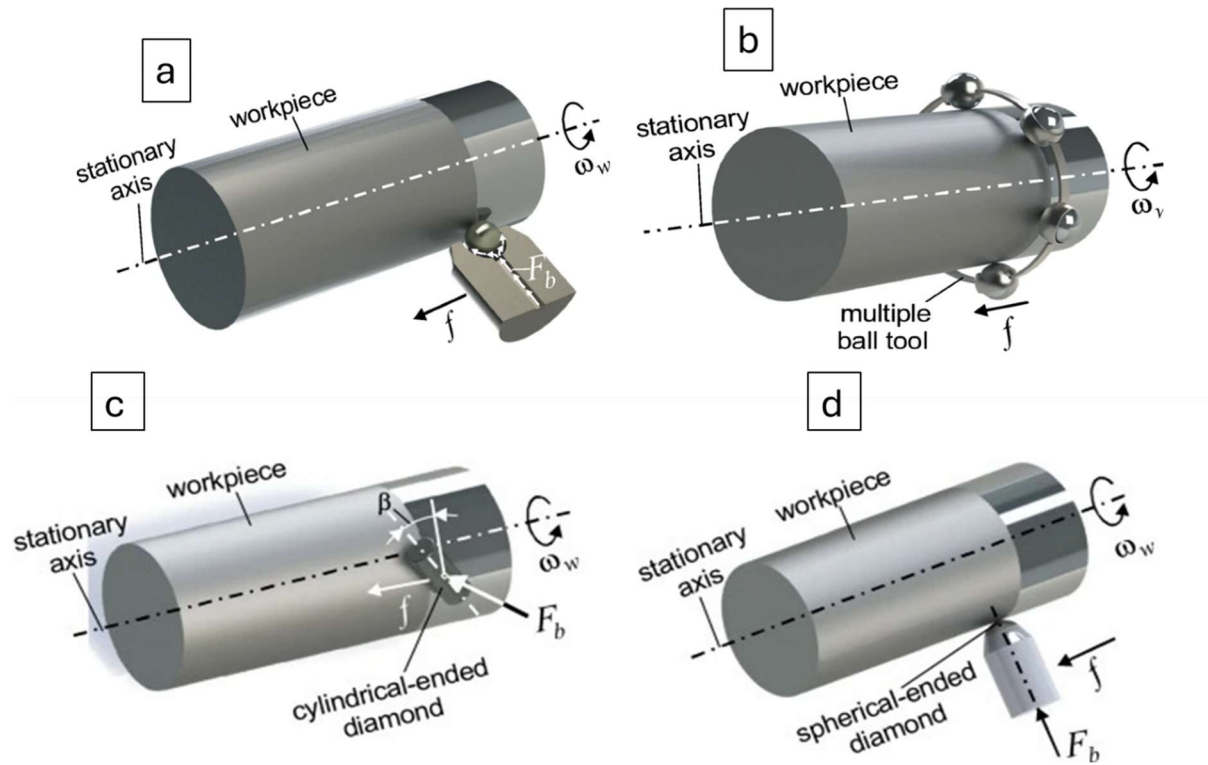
Different burnishing tools schematic, (a) single roller ball, (b) multiple roller ball, (c) cylindrical sliding, and (d) ball sliding [7].
